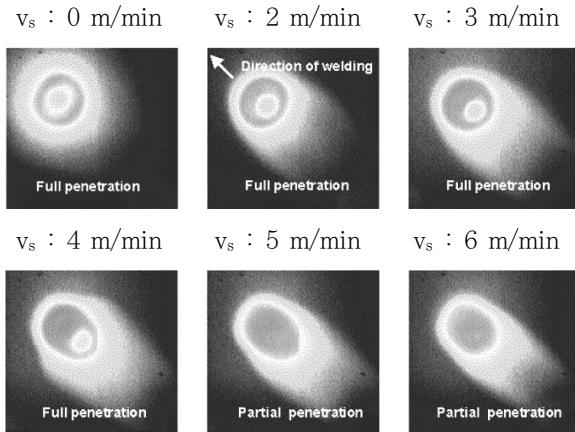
Weld pool monitoring image using CMOS camera¹¹⁾
